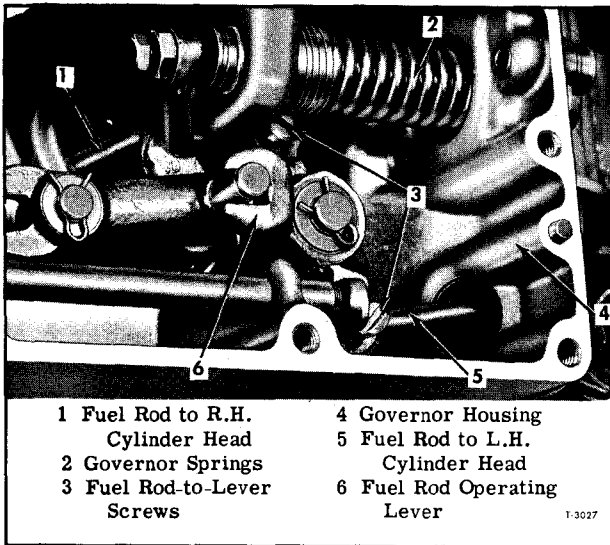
Governor Housing Cover Removed Showing Fuel Rod Connecting Screws
